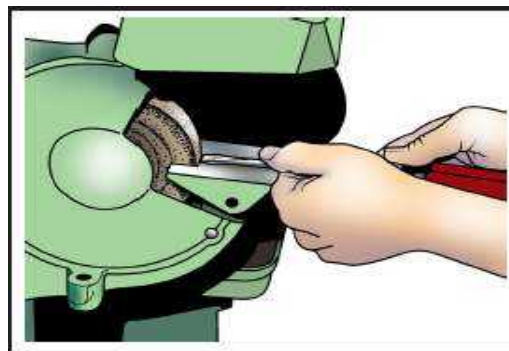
Reconditioning a Screwdriver on a Bench Grinder, With Tool Supported by the Tool Rest
